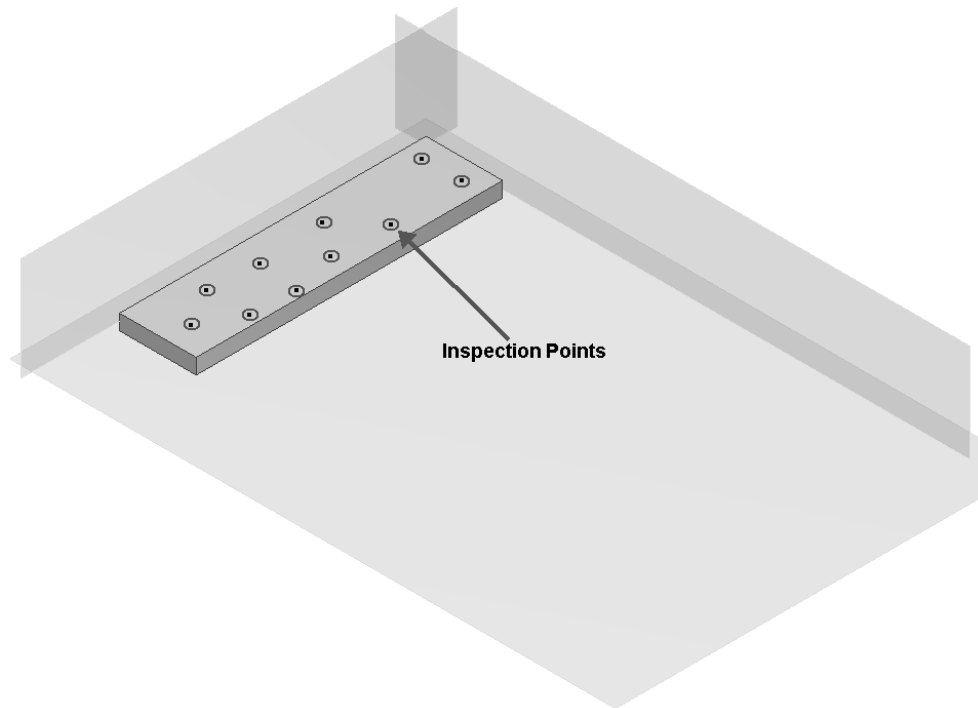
CMM inspection points in Autodesk Inventor.
